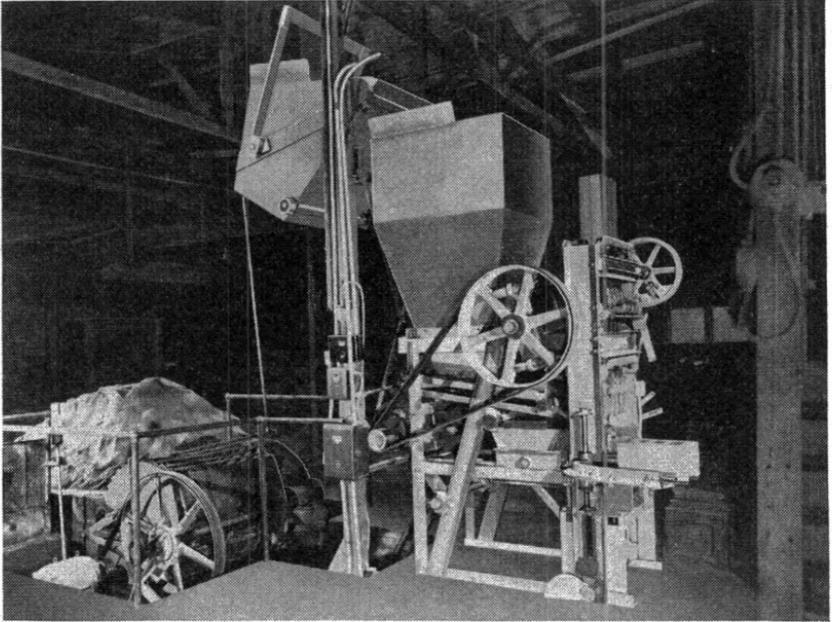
Tamping equipment operating in small, modern concrete masonry plant. Block machine has capacity of 2,000 8 x 8 x 16-inch blocks per 8-hour day. Note mixer located on machine floor level, skip-hoist for elevating concrete to block machine, and plant lay-out designed for future installation of overhead bins and additional block machines as business expands.
